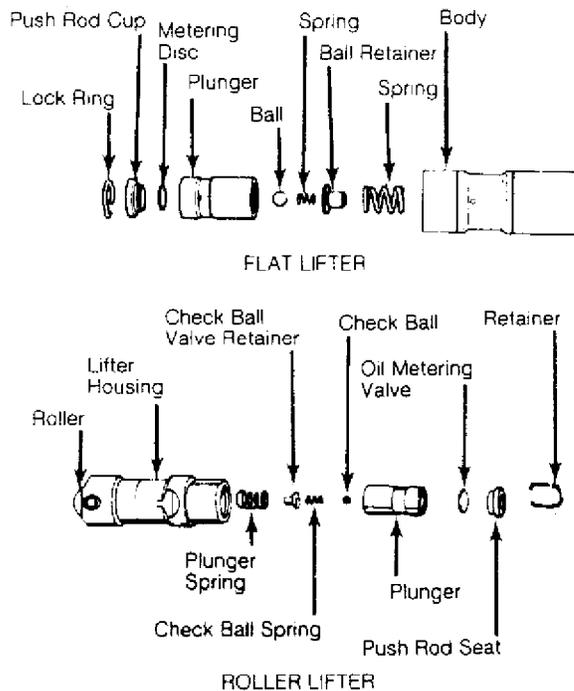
Typical Hydraulic Valve Lifter Assemblies - Typical
